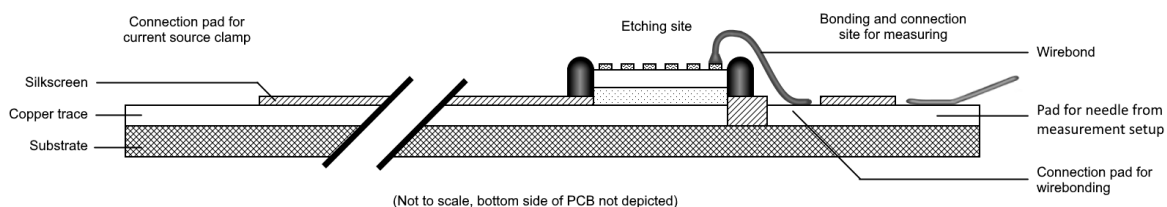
Schematic view of the PCB with the chip attached for testing.
